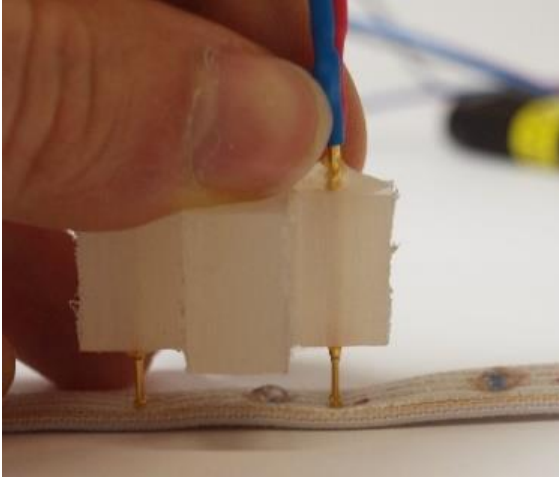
The special designed tool manufactured at our Department of Materials and Technology
